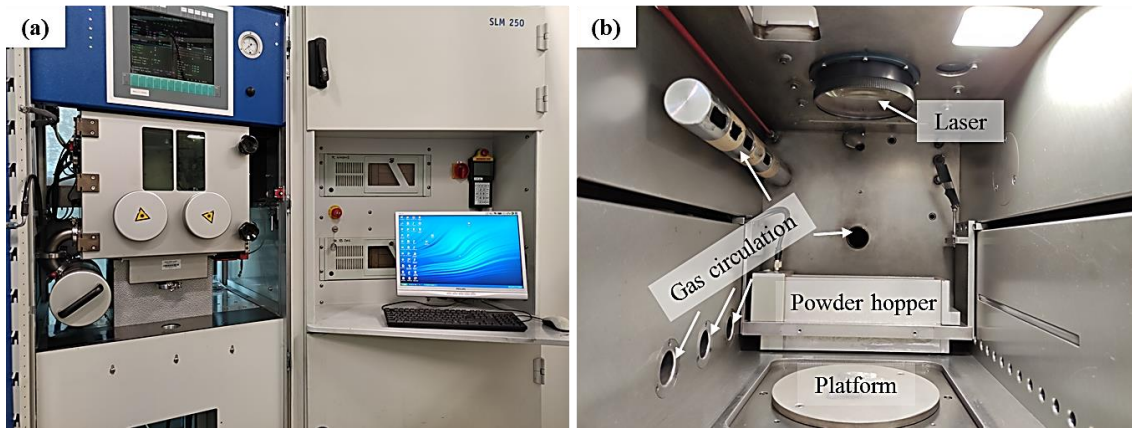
(a) The utilized SLM system, (b) working chamber
